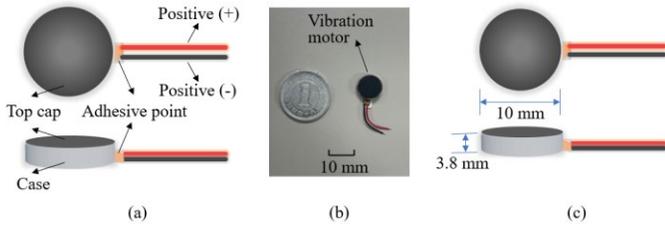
The details of vibration motor. (a) elaborate components; (b) real layout; (c) dimension parameters. (Top view and main view)
